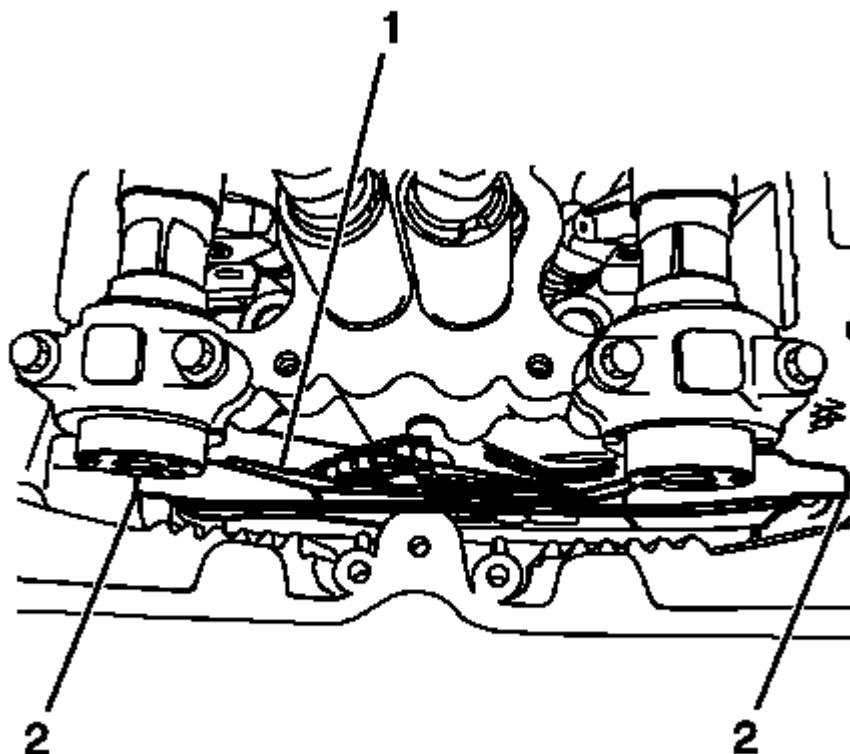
Identifying Rubber Band & Upper Timing Chain Guides
